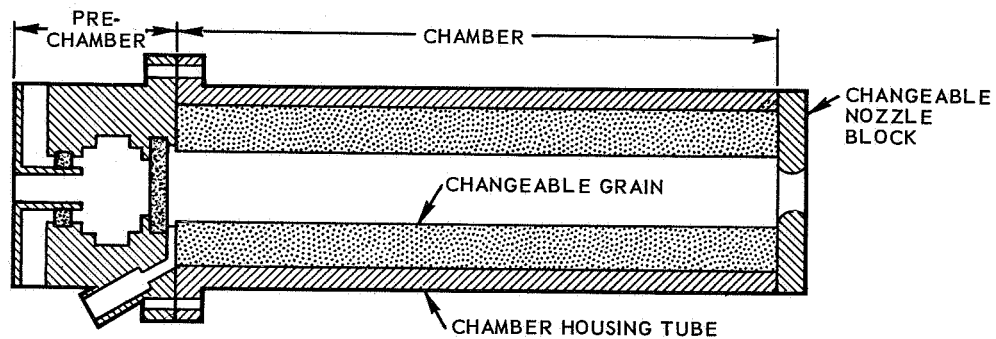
Cross-Sectional View Showing the Relation of the Prechamber to the Model Chamber Tube. Grain pieces are slid into place on removal of the nozzle end plate.
